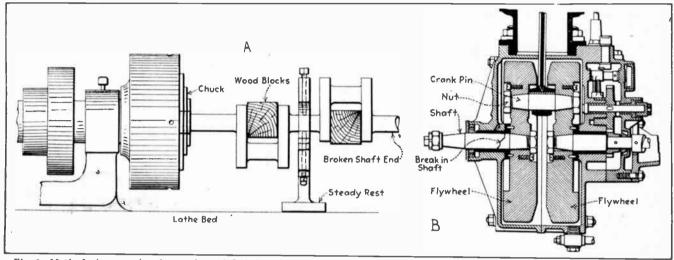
Method of supporting damaged crankshaft in lathe for turning off broken main bearing shaft shown at A. Built-up crankshaft construction at B
